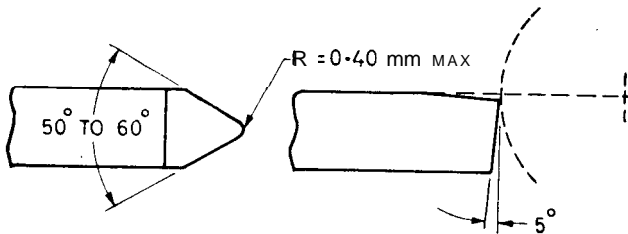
METHOD OF GRINDING TOOL BIT FOR ROUGH THREADING
